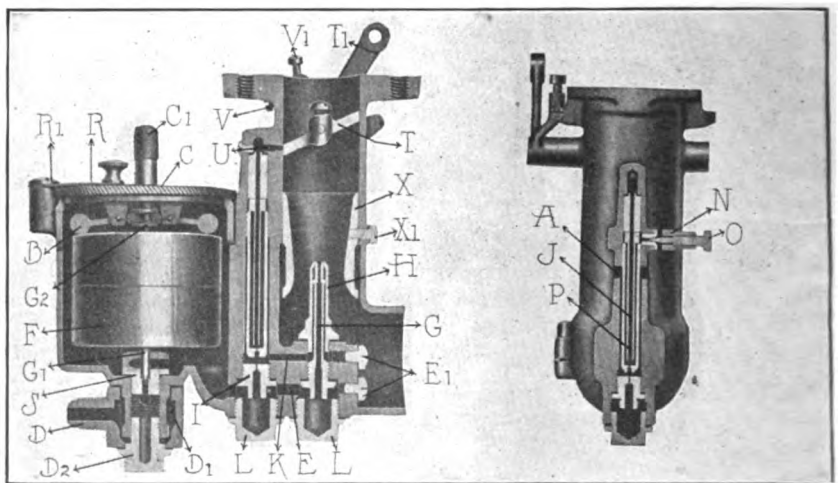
Cross Sectional View of Zenith Carburetor—The Principal Parts Are: G, Main Jet; I, Compensator; X, Choke Tube; P, Secondary Well; O, Slow Speed Screw; T, Butterfly Valve; J, Priming Tube; U, Passage for Priming Fuel; F, Float; G I, Needle Valve; B, Valve Lever Weight; T I, Control Lever; J, I, K, Constant Flow Device; H, Nozzle.
